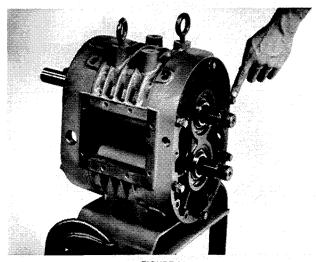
SIX CAPSCREWS WITH SPACERS USED TO TEMPORARILY FASTEN GEAR END PLATE TO UPPER AND LOWER HOUSING HALVES
